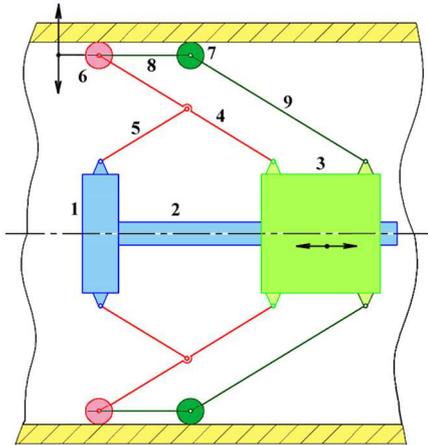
Machine arm arrangement of wheeled machine with adjustable wheels CEREVKA
